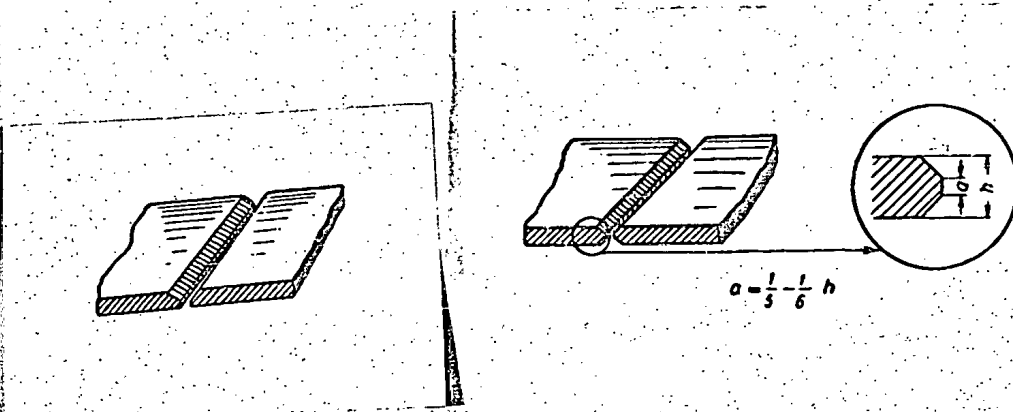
Single - V butt joint Fig. 10. - X - butt joint
